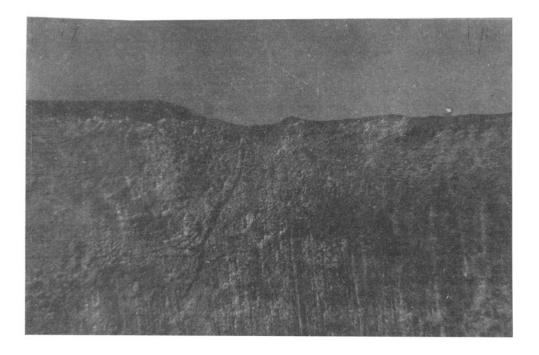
Weld zone corrosion after six months of exposure at Tuticorin seawater.
